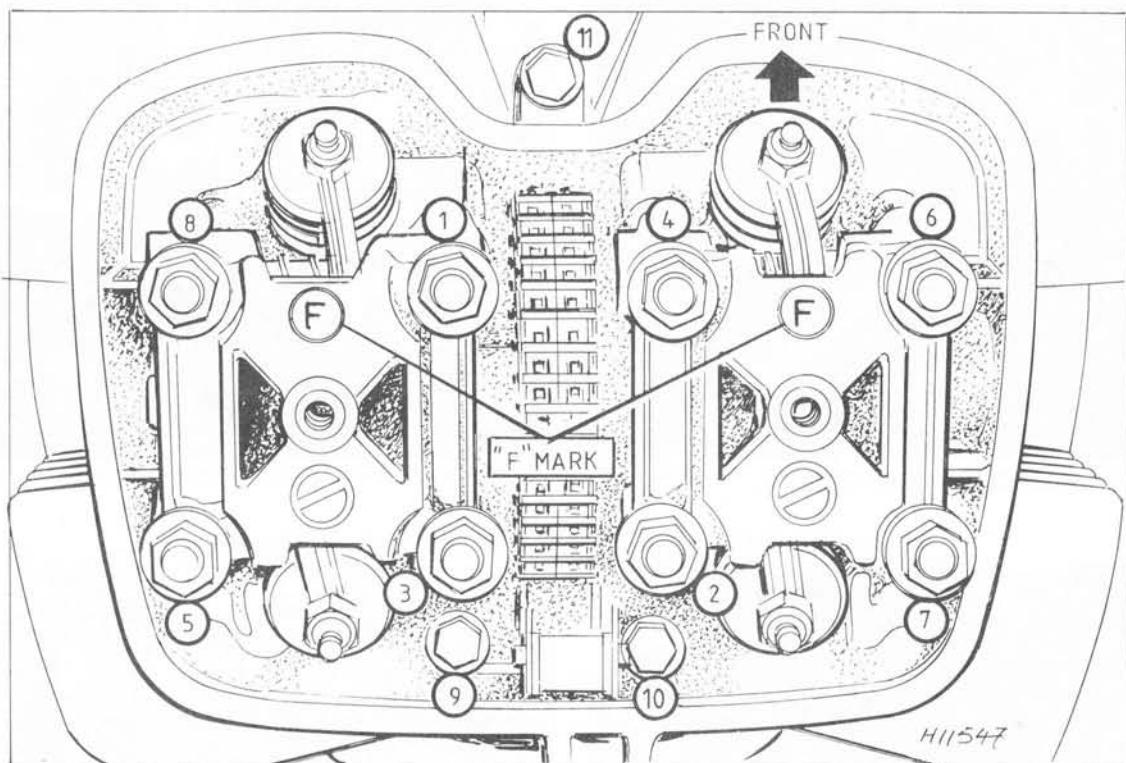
Cylinder head nut and bolt tightening sequence
